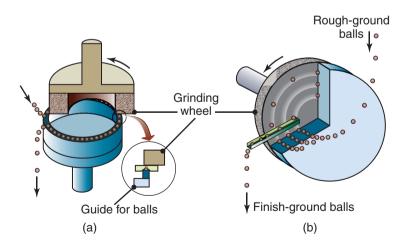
(a) Rough grinding of steel balls on a vertical-spindle grinder. The balls are guided by a special rotary fixture. (b) Finish grinding of balls in a multiple-groove fixture. The balls are ground to within 0.013 mm of their final size.
